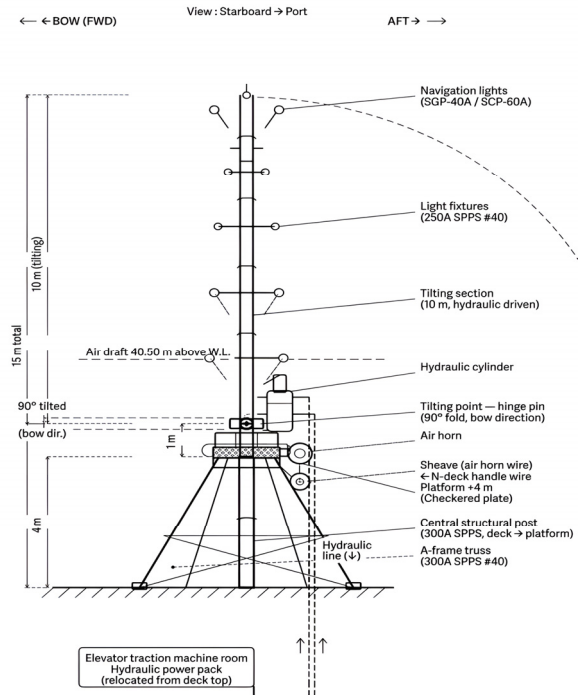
Hyd. power pack relocated to elevator traction machine room
